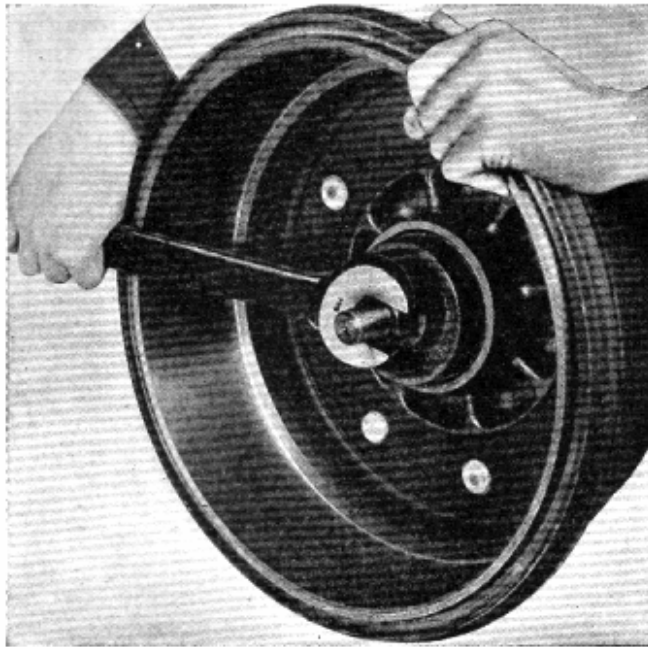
Installing the Inner Bearing Race Using Tool No. X-1239-B
